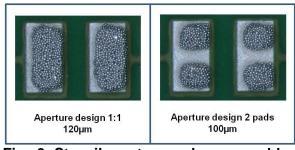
Stencil aperture and proper solder paste print for OSLON Compact CM
